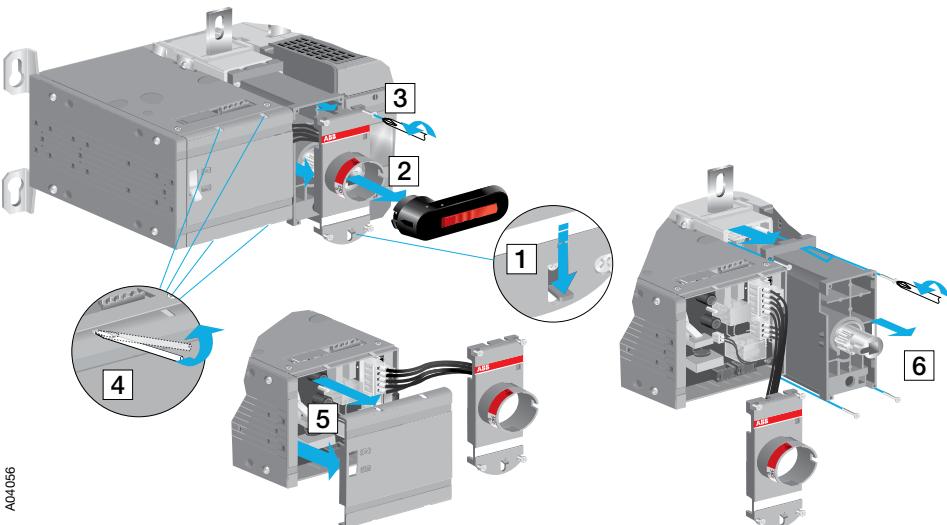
Optional extra; Test auxiliary contacts can be mounted on the switch mechanism, first remove the covers as shown in the figure
